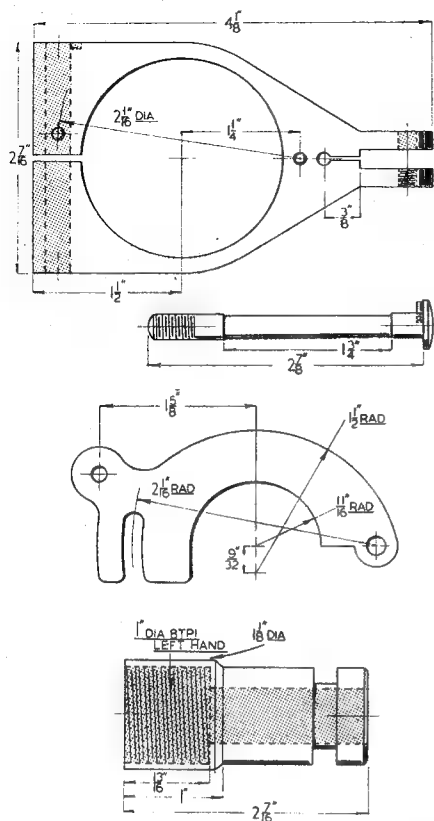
Drawings of the parts requiring modification when the attachment is applied to the Myford ML7 lathe
